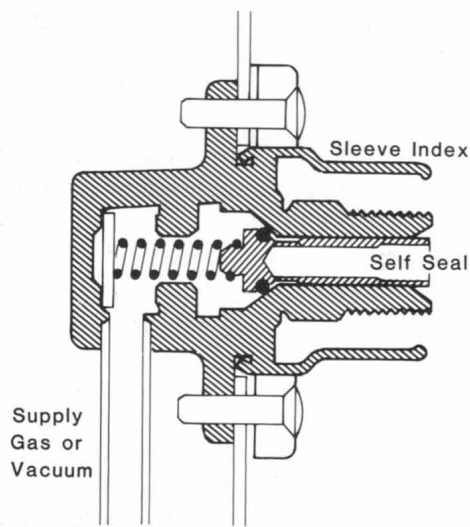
An integrated sleeve indexed outlet with a self-sealing valve. The sleeve index is bonded with the connecting thread. The protruding tip inside the screw thread allows it to be pushed back when the hose is connected. The self-sealing valve is held in place by a spring which is strong enough to prevent spontaneous opening with medical vacuum.
